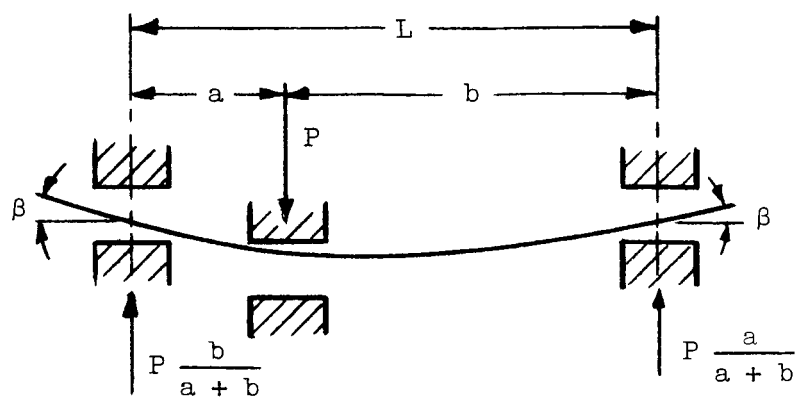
Unsymmetrical loading condition of simply supported shaft showing attitude of deflected shaft to end bearings.
